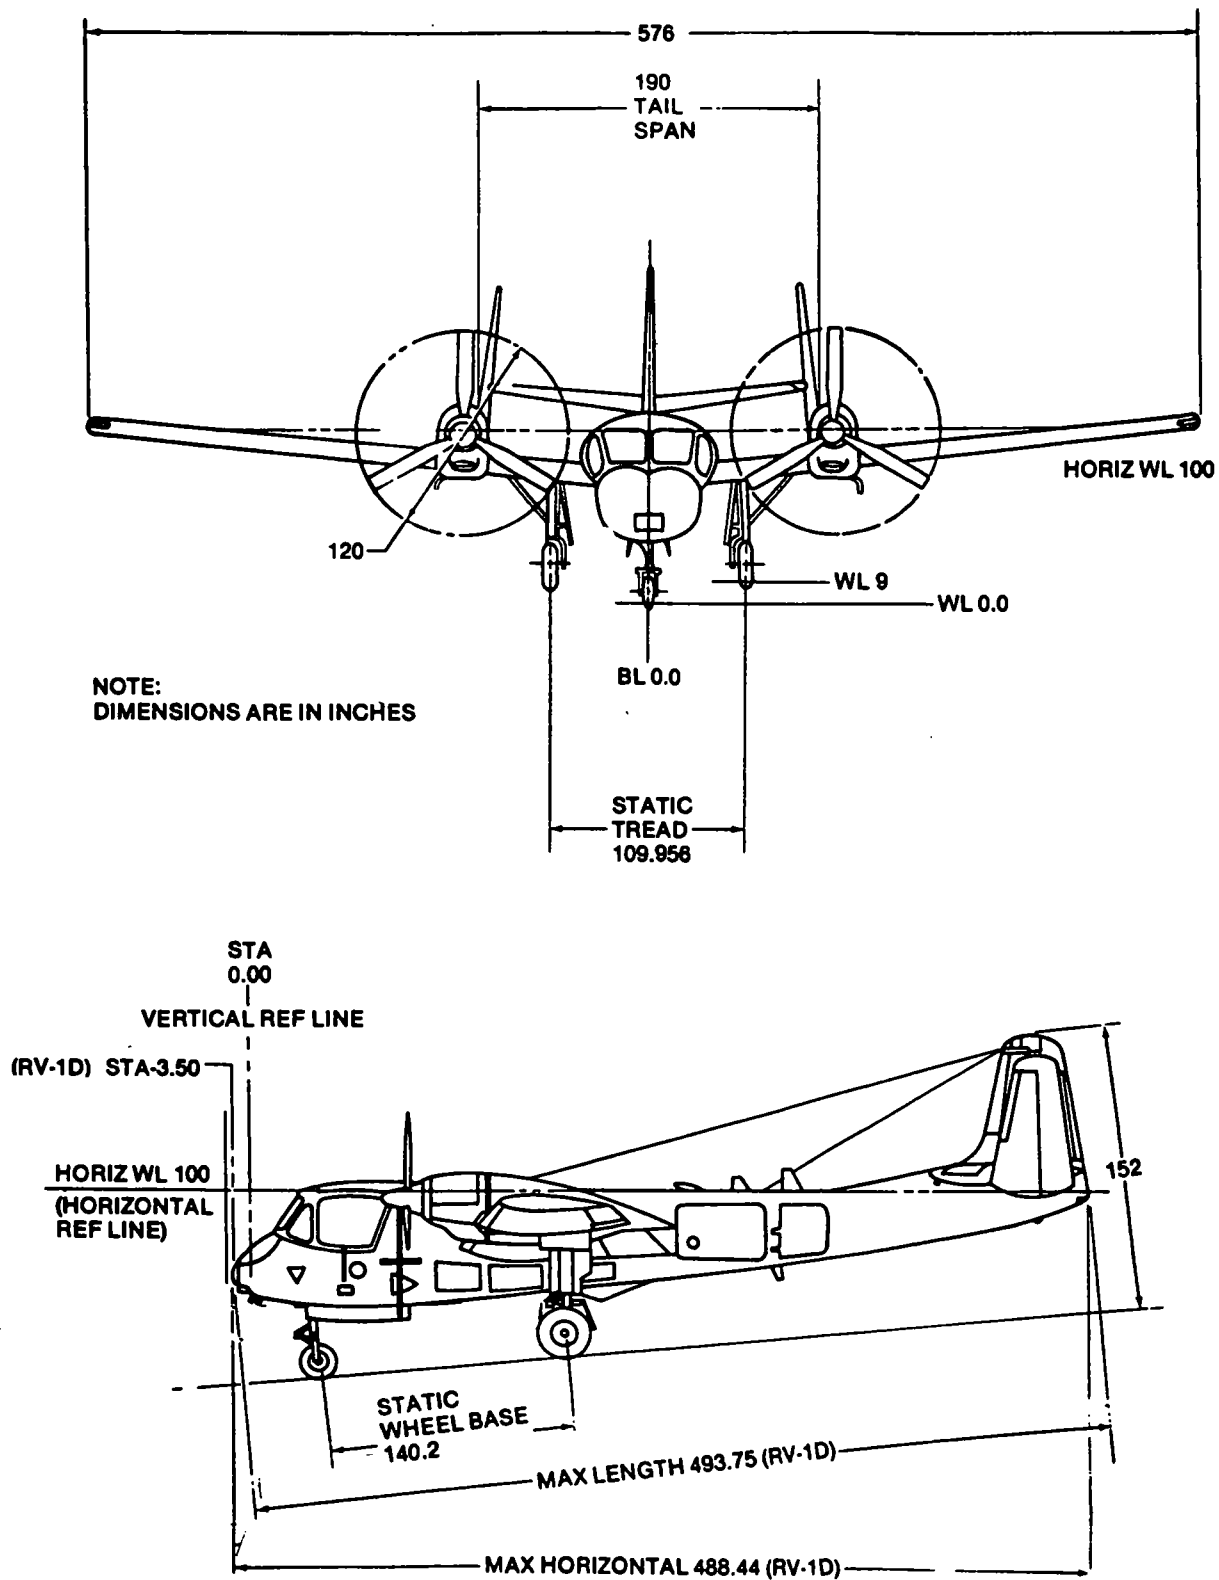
Principal Dimensions, RV-1D (Mohawk)
